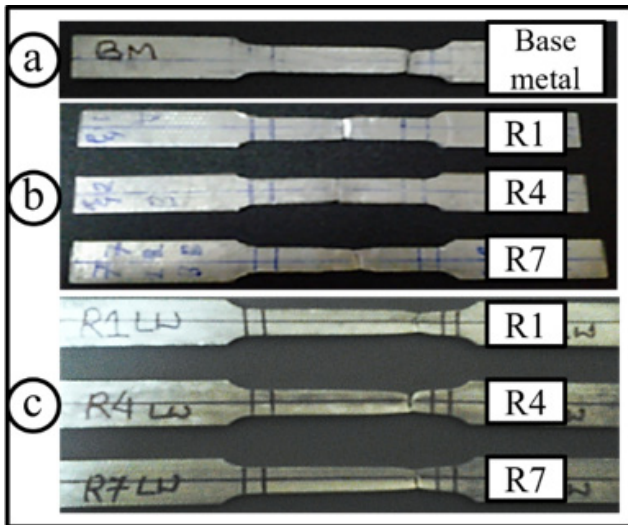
Fracture specimen after tensile tests; (a) base material, (b) across transverse to the weld, and (c) along longitudinal to the weld
